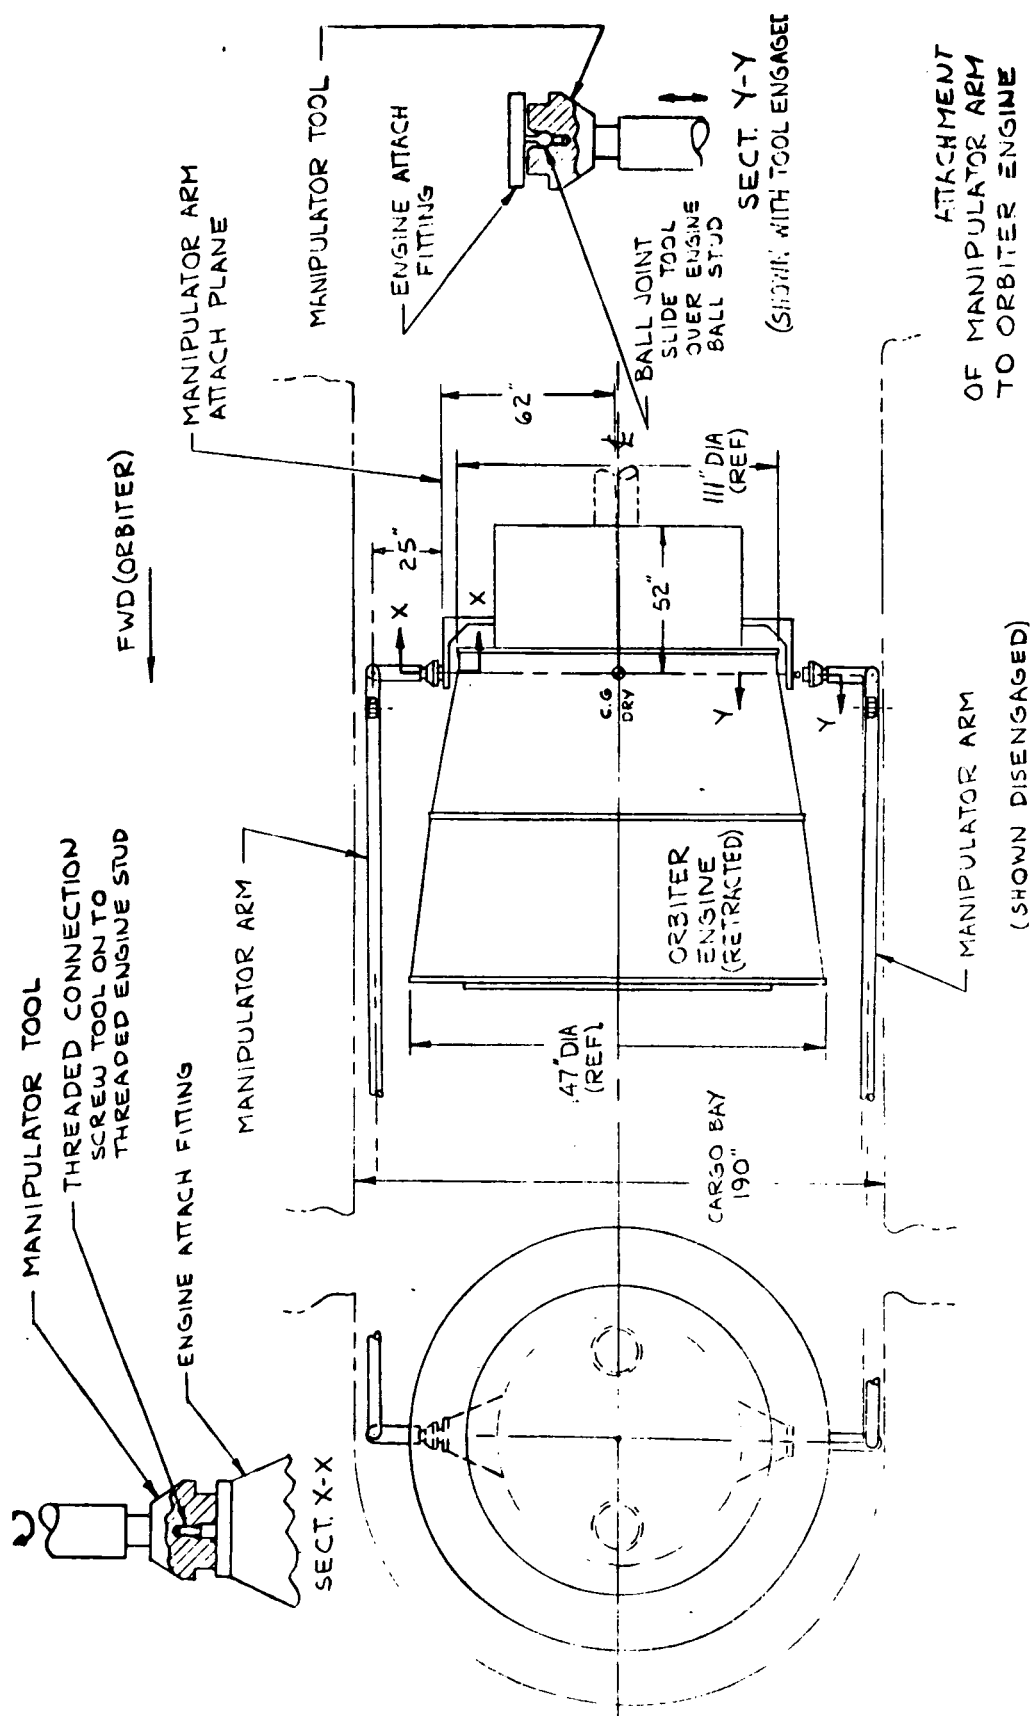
Manipulator Arm Attachment to Orbiter Engine
